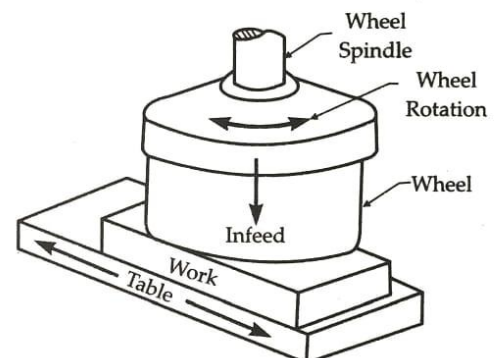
Working principle of a Vertical Spindle Reciprocating Table Surface Grinder.
